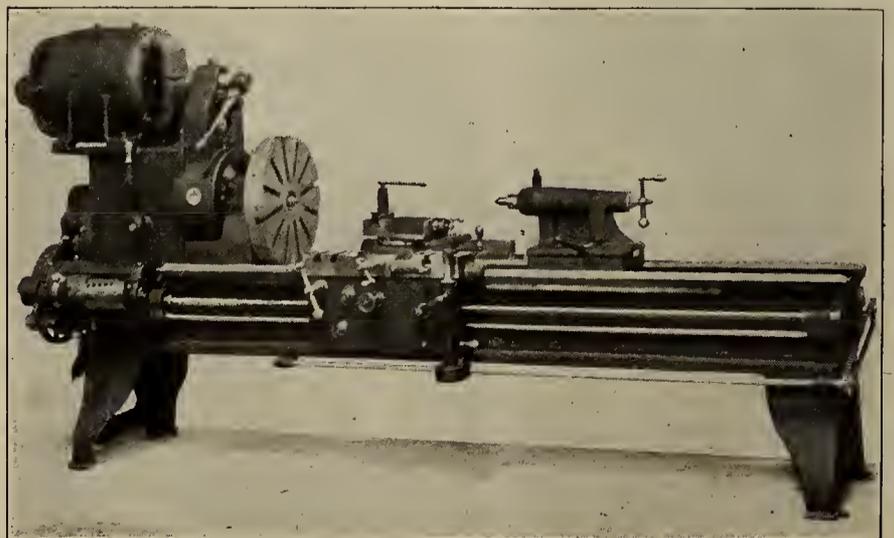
20-INCH LATHE WITH VARIABLE SPEED MOTOR.
